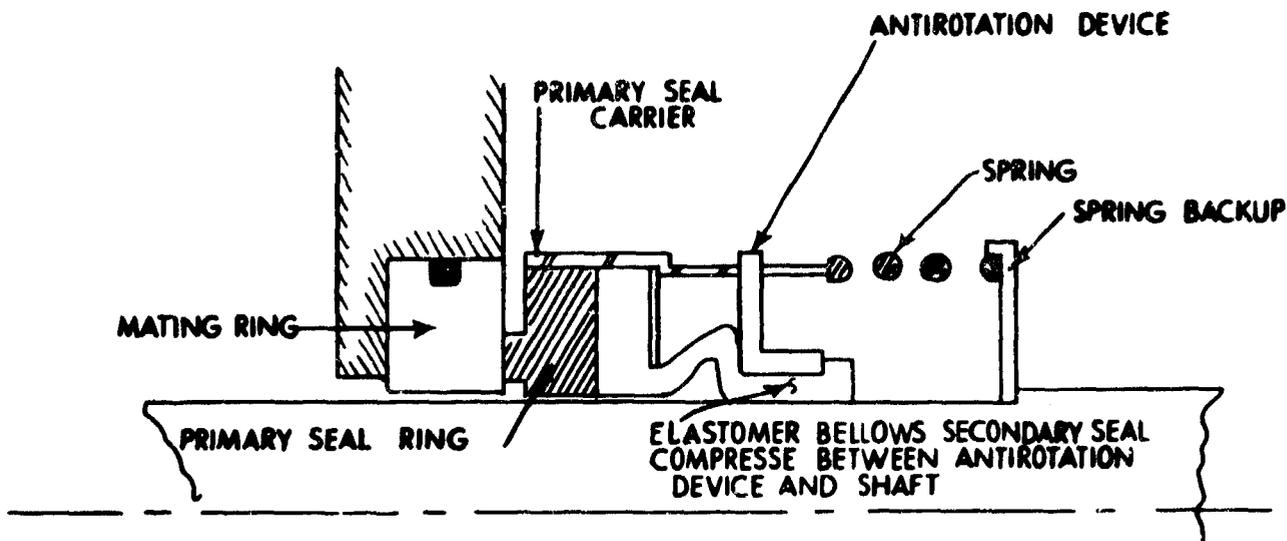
Shaft-Mounted Face Seal with Elastomer Bellows Secondary Seal
